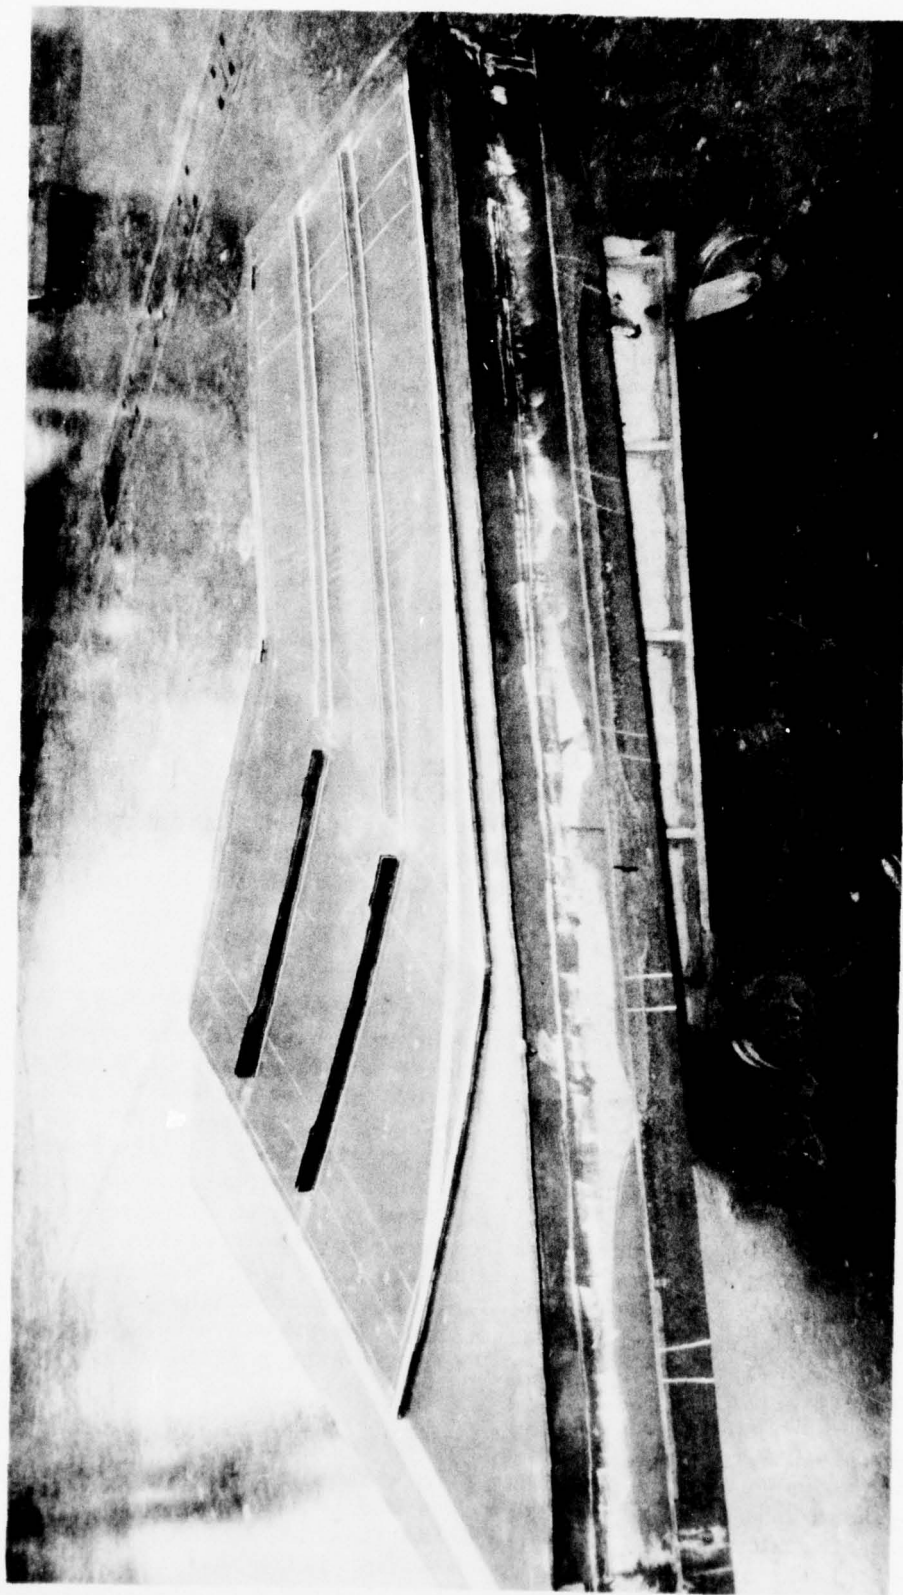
LOWER INTERMEDIATE SPAR CAPS BONDED TO LOWER SKIN PANEL
